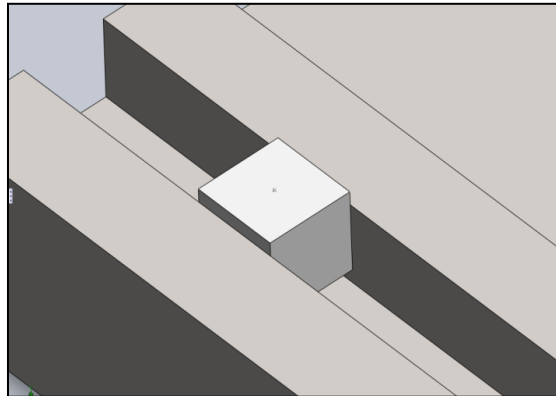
The top of the cube would then be faced and the edges would be located using an edge-finder.
